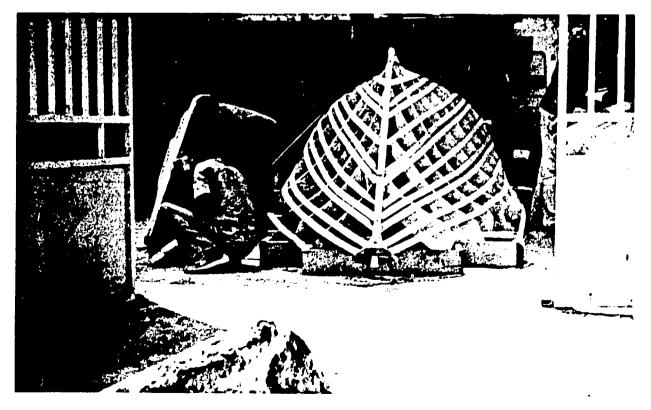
NEW FRAMES ASSEMBLED AND READY FOR C-FLEX PLANKING
